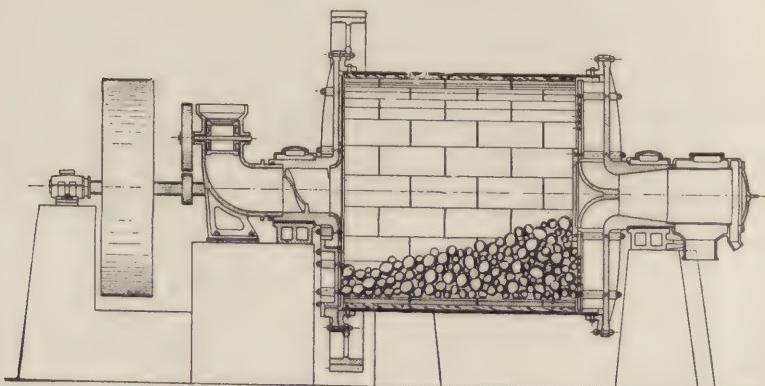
Ball-tube mill. (Chalmers & Williams Co.)
